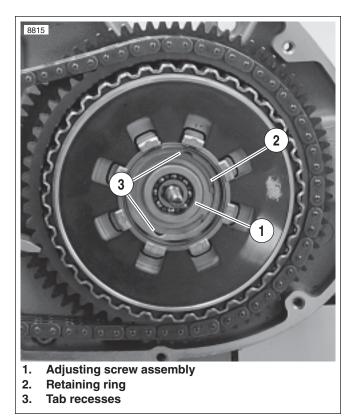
Clutch Adjusting Screw Assembly and Retaining Ring
